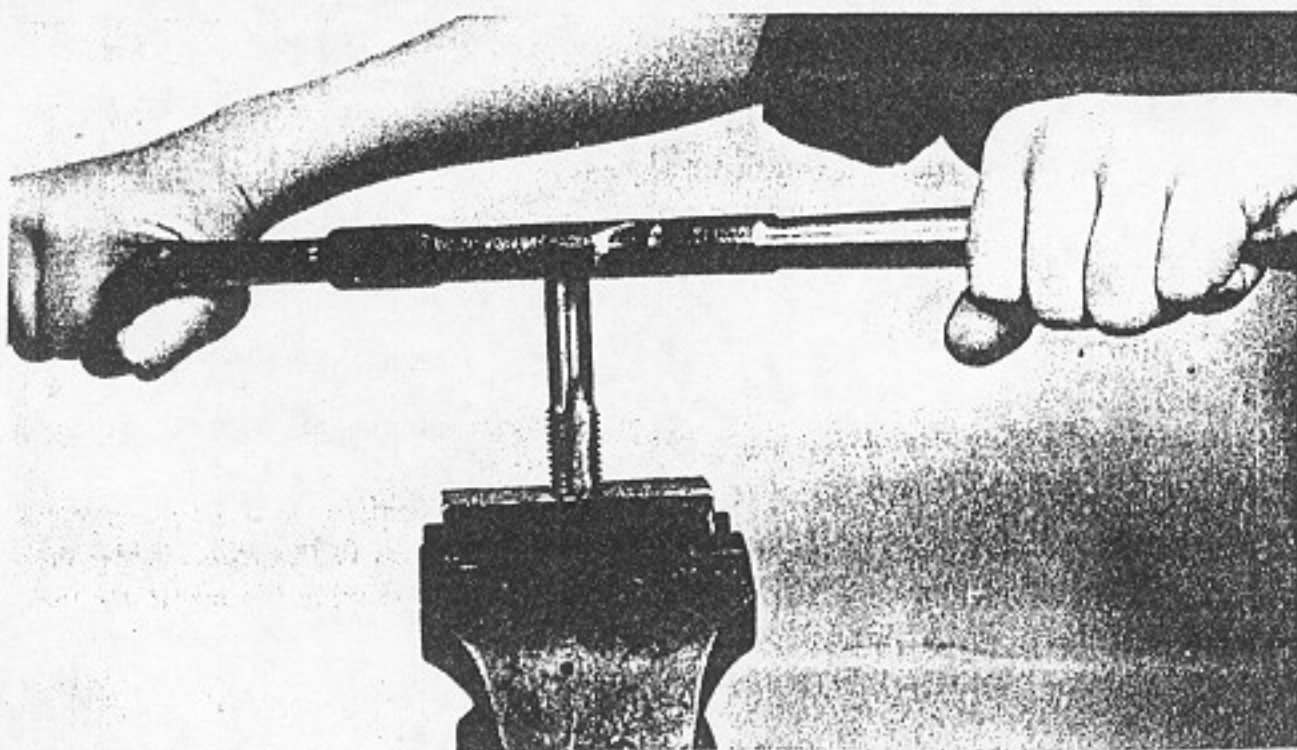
A tap is hard and brittle; for this reason, it is liable to break easily. You should use great care when you are turning the wrench, so as not to break the tap. Above: starting a tap in a drilled hole. Right: checking a tap for squareness after it has been started.
